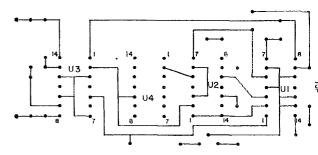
Printed-circuit layout for solder side of board. Scale is actual size.
